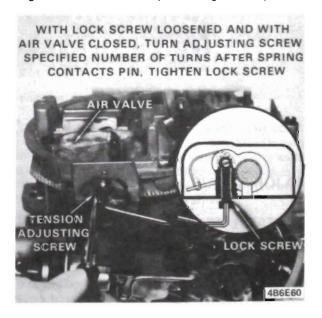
E-60 - Air Valve Spring Wind-Up Adjustment
